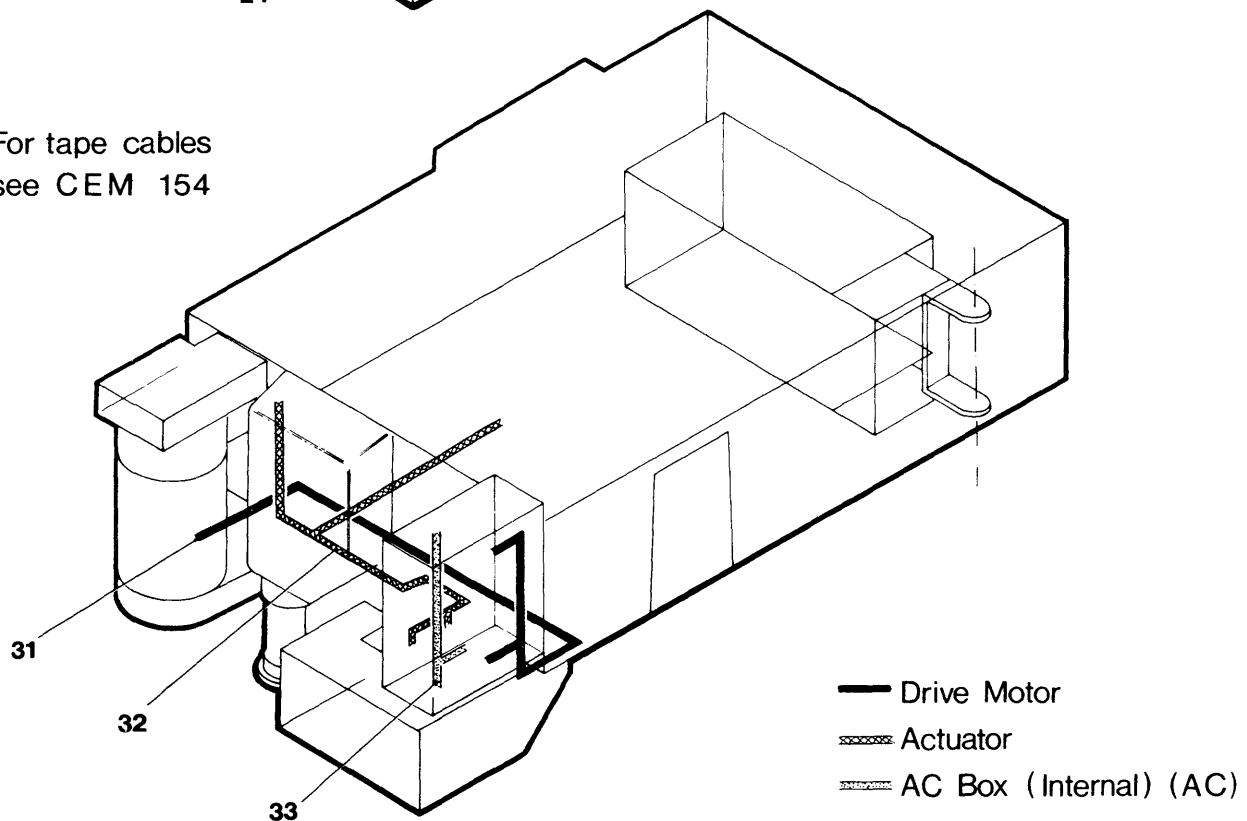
CABLE ASSEMBLIES (PART 2 OF 2)
